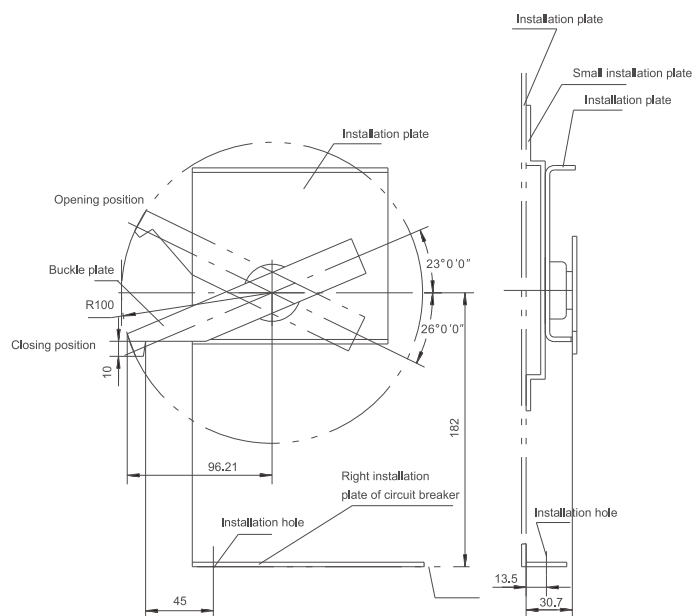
NA8-2500~4000 fixed type circuit breaker status door interlock installation dimensions
